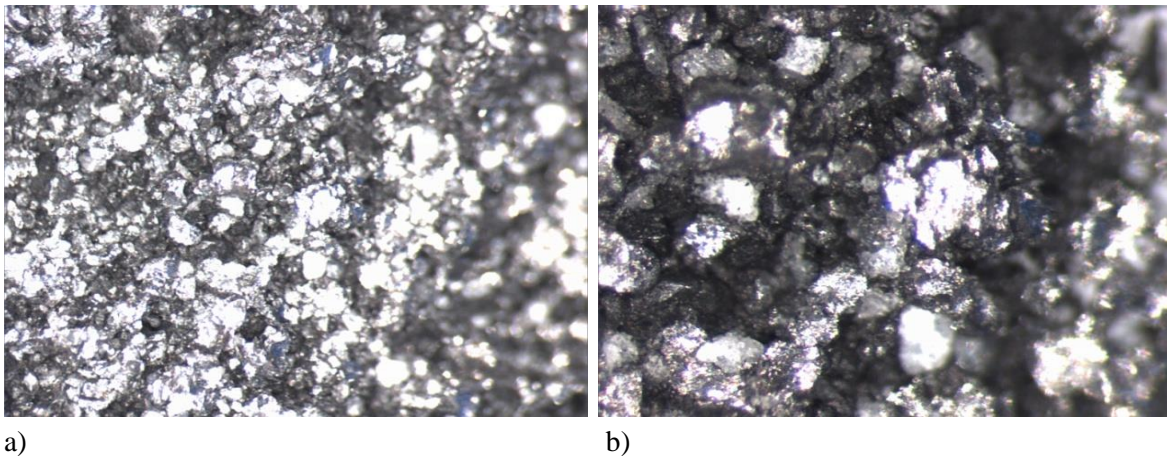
Surface of casting, sand fraction 0.3 mm with inacol: a) 25x and b) 60x
